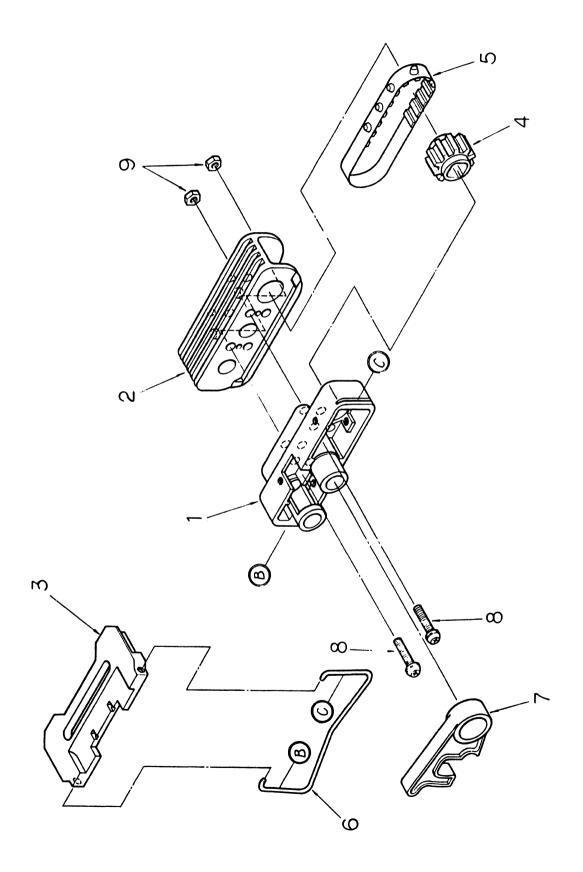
Sprocket Assembly (L) (FMX-35150-2)
